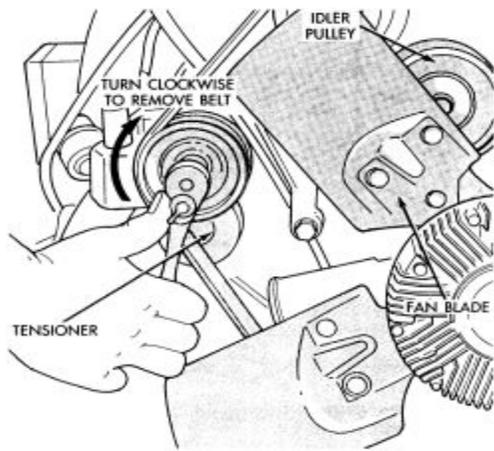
Rotate the tensioner assembly clockwise until the tension has been removed from the belt
